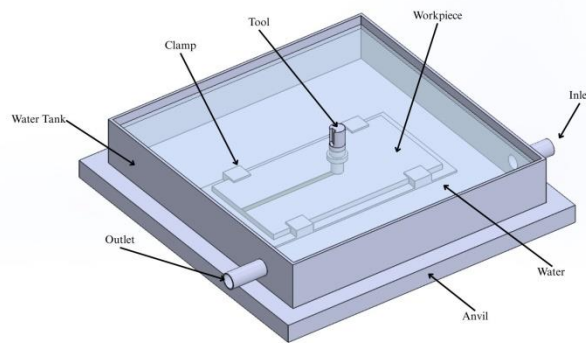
Schematic diagram for Underwater Friction Stir Welding
